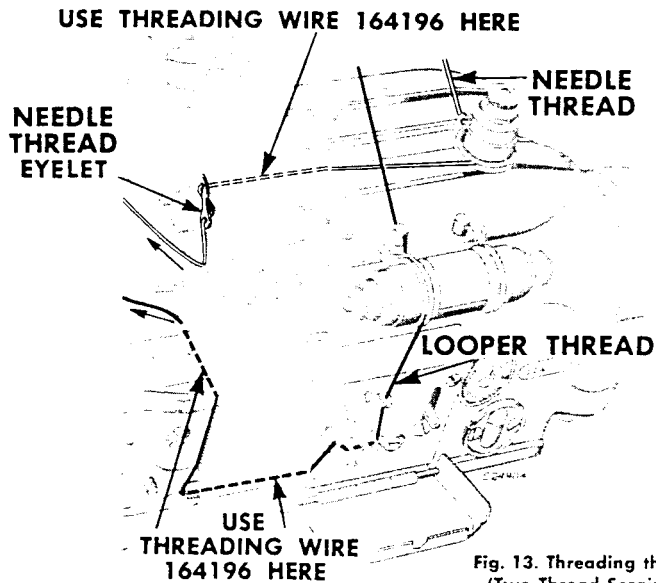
Threading the Machine (Two-Thread Serging Stitch)
